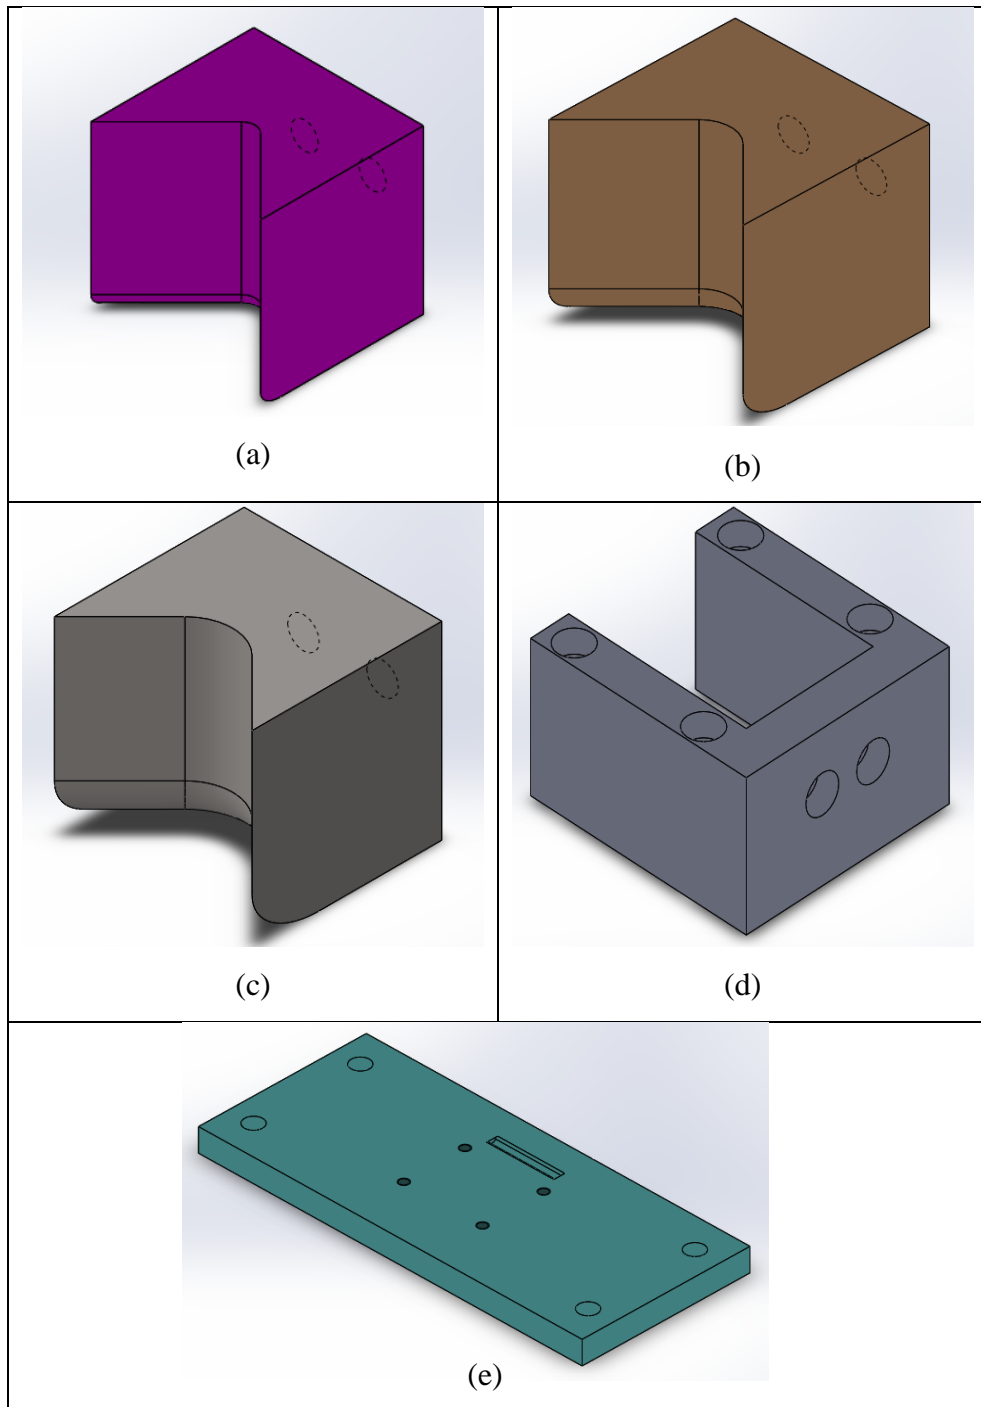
5: (a) Die with Radius 4mm, (b) Die with Radius 8mm, (c) Die with Radius 12mm, (d) Die holder and (e) Bottom Plate
